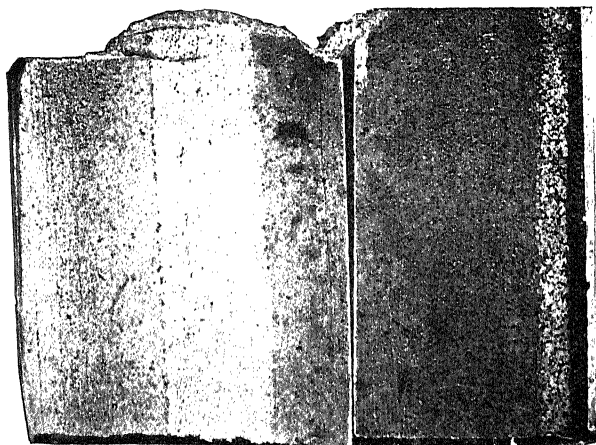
COALESCENT TYPE, FULL SIZE OF BEARING SURFACE OF HEAD IN FIGS. 21 AND 22. RAIN HAD PARTLY DIMMED BEARING SURFACE OF HEAD BEFORE TRAIN HAD PASSED OVER RAIL, AND THE SEVERAL WHEEL CONTACTS ONLY MADE BRIGHT BAND ABOUT 0.5 IN. WIDE. CRACK ON GAGE SIDE OF HEAD, SIMILAR TO THAT IN FIG. 18, WAS FOUND BY TRACKMEN AND RAIL REMOVED BEFORE IT BROKE.
